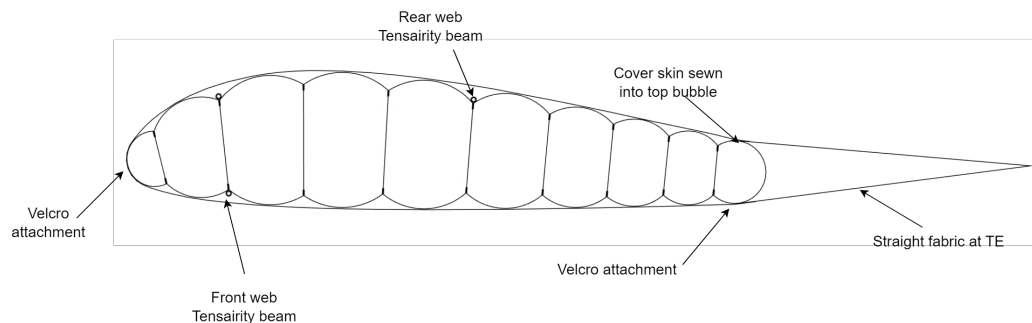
Internal layout of fabric tubes, tensairity elements and cover skin creating the airfoil shape.
